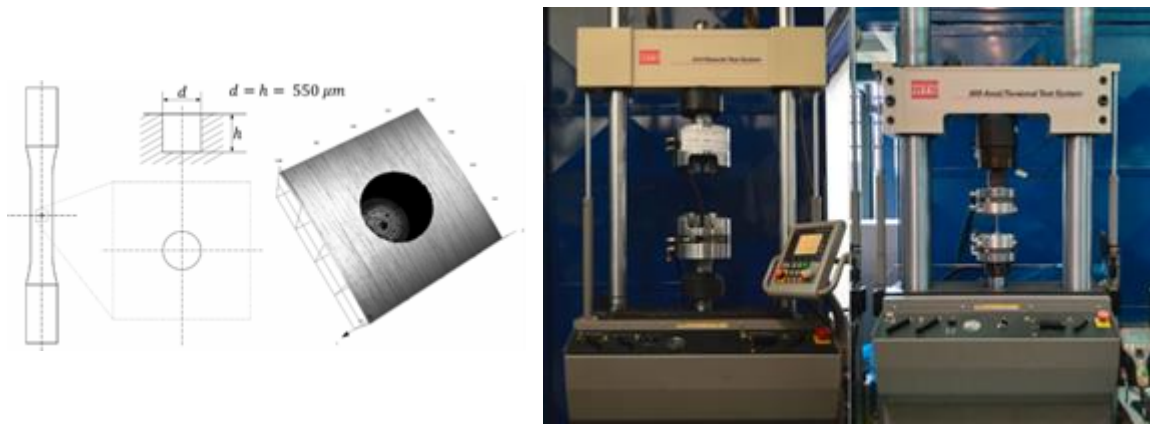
On the left, micro hole produced in fatigue specimens. On the right, Fatigue Testing Machines, MTS - 810 Material test system and MTS - 809 Axial/torsional test system.
